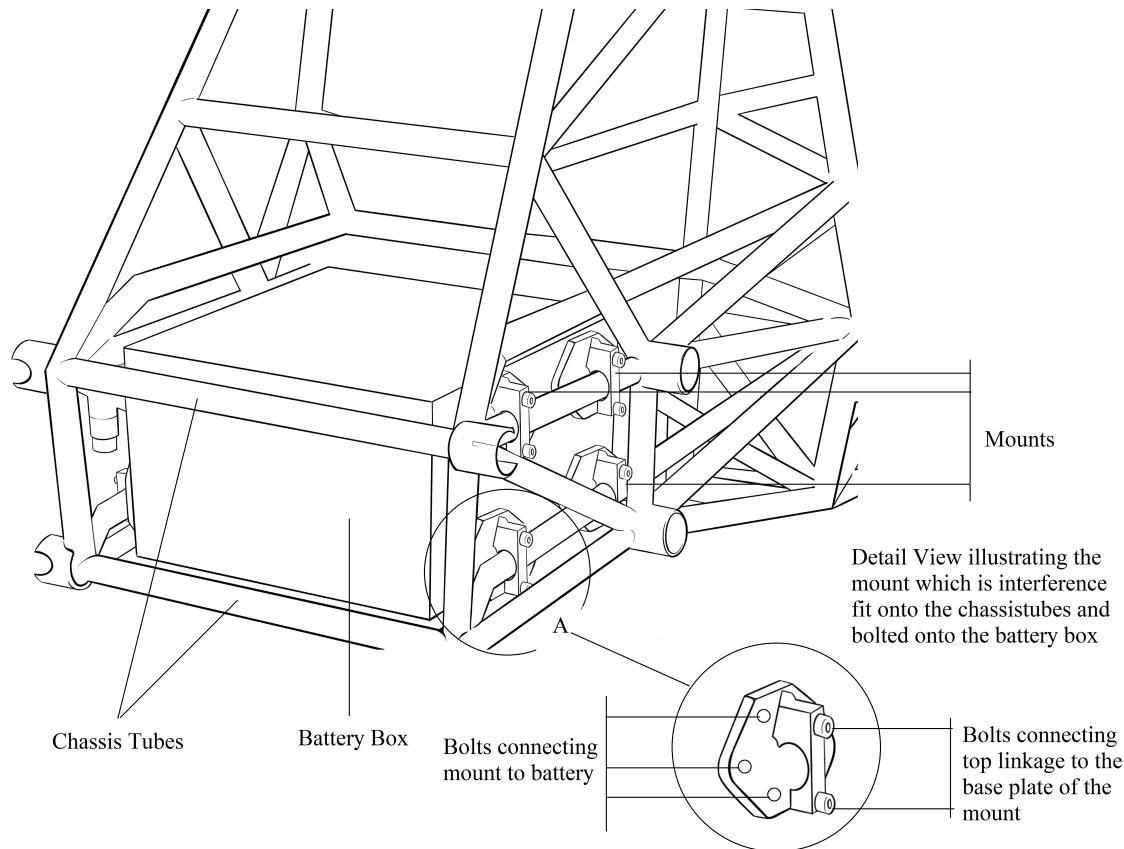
Isometric view of a battery directly mounted onto the chassis tubes [21]
